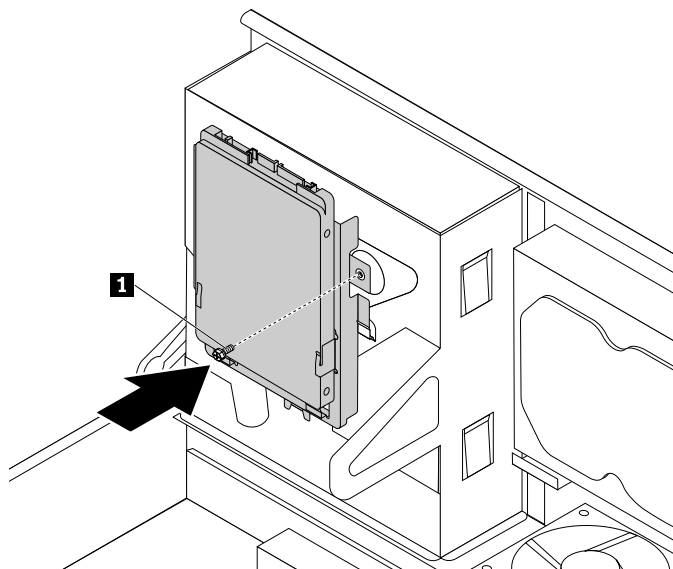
Installing the screw to secure the bracket on the bottom of the optical drive bay
